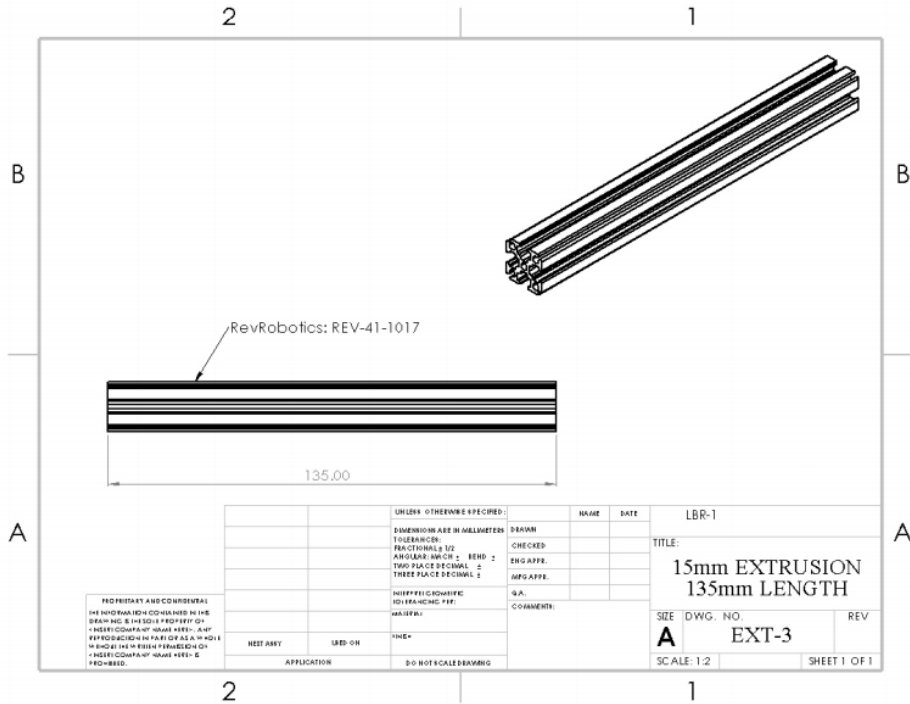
Part drawing of the 15mm extrusion to hold the motor and motor mount for the linear slide assembly.
